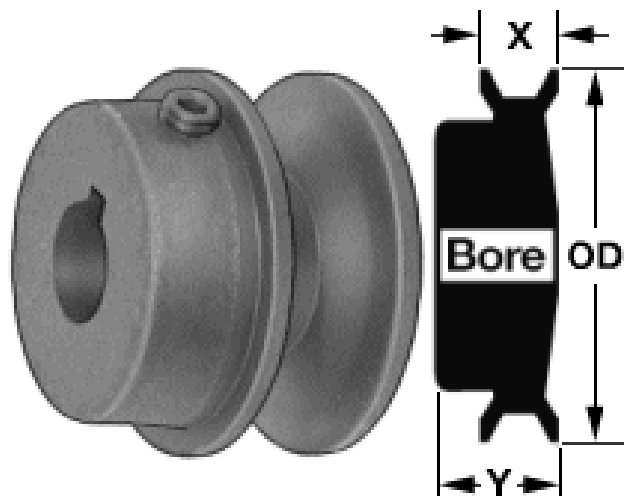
3.75" OD V-belt Pulley on 2 HP Motor
